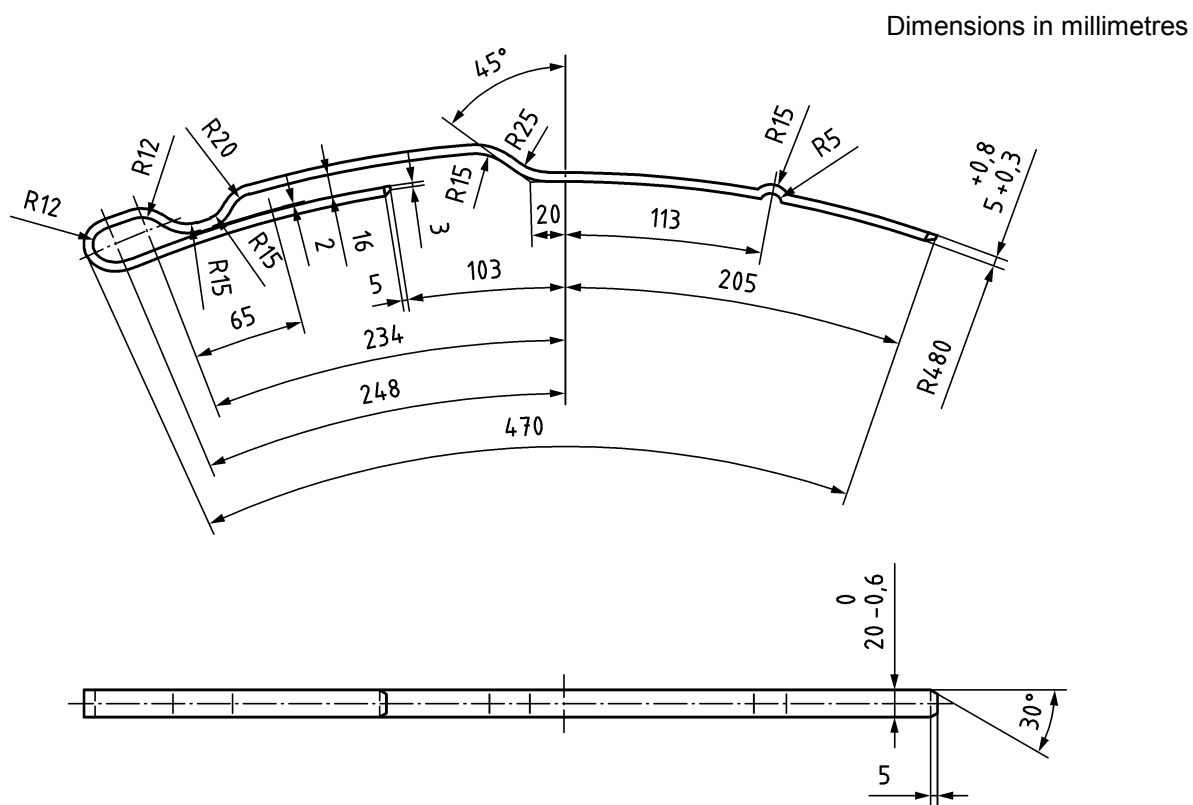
Special-shaped brake shoe key for improved securing of the brake block
